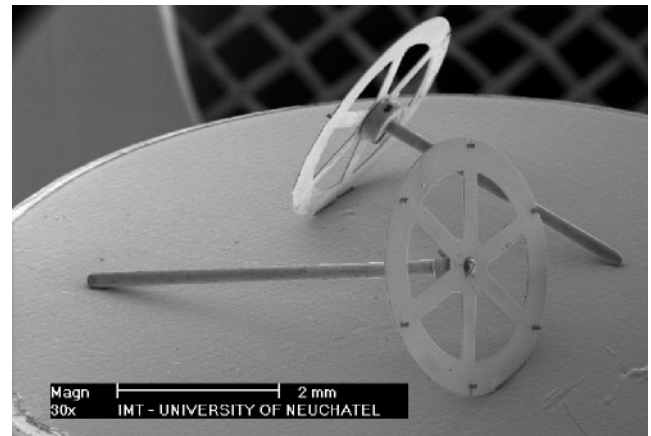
SEM image of the component rotor mounted on a stainless steel axle
